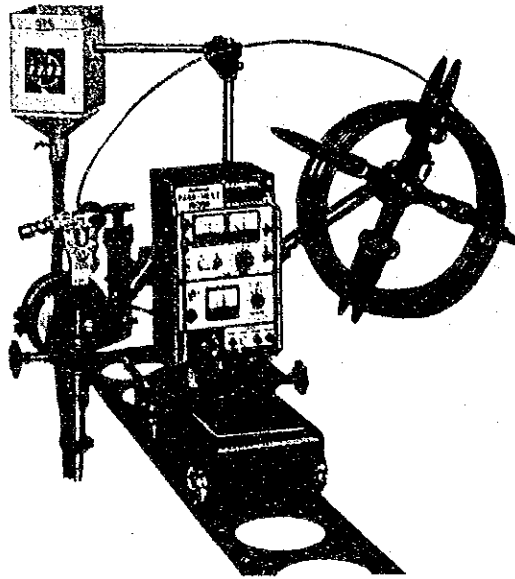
Submerged Arc Welding Machine
